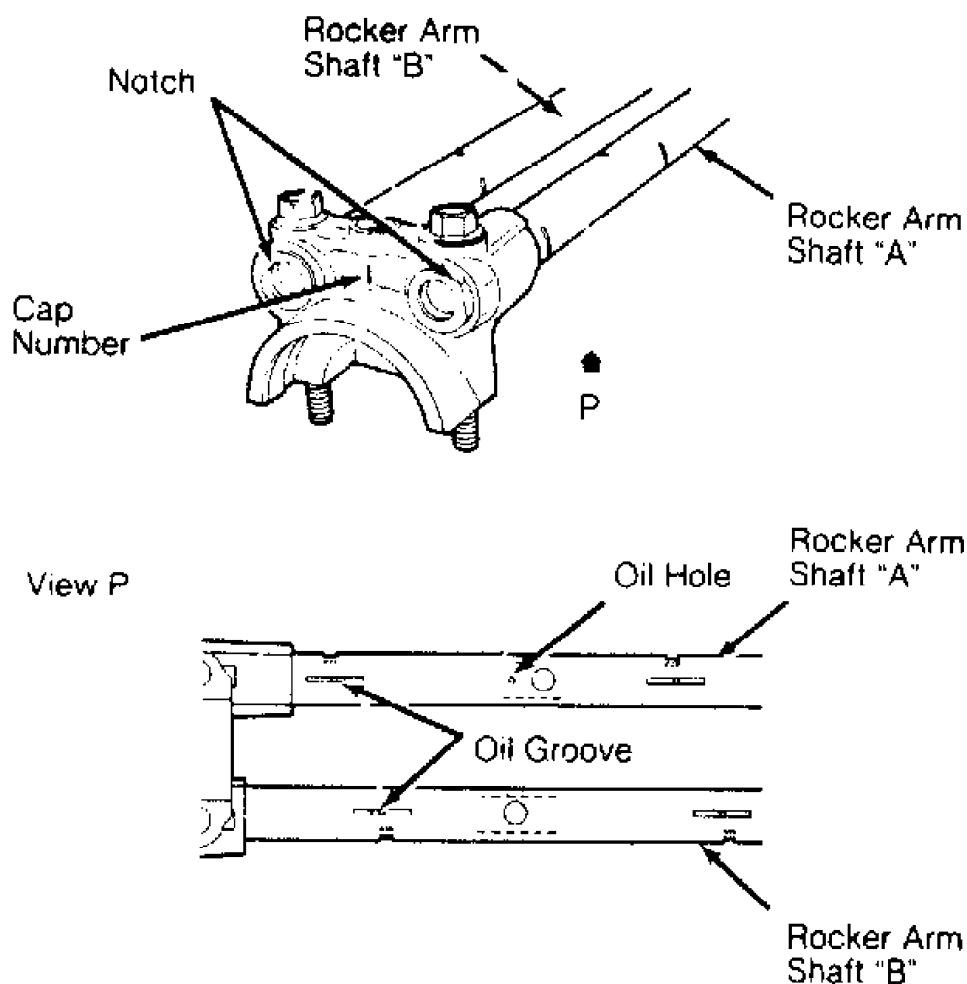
Installing Rocker Arm Shafts (SOHC)
